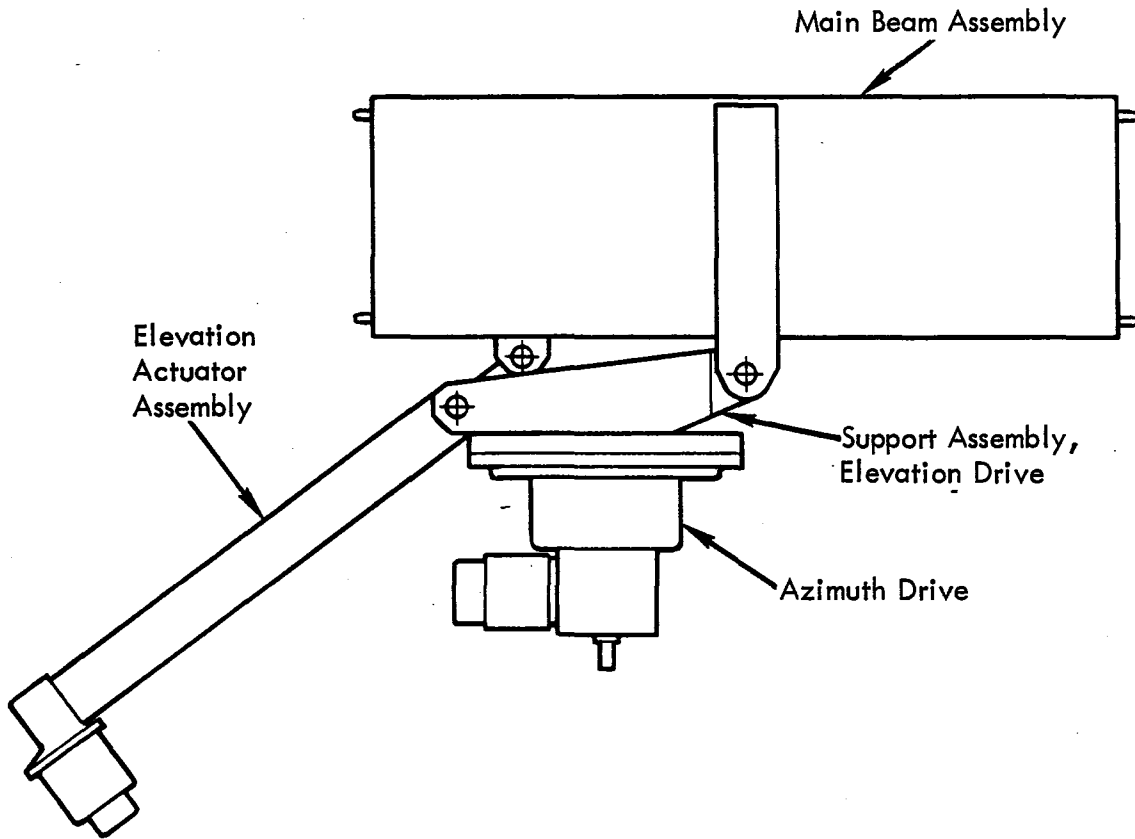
AZIMUTH/ELEVATION DRIVE/MAIN BEAM ASSEMBLY
